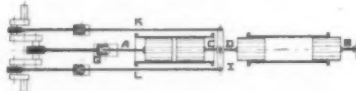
Elementary plan of two-cylinder horizontal tandem engine showing connecting-rod system for the two inner pistons operating on the side cranks.
